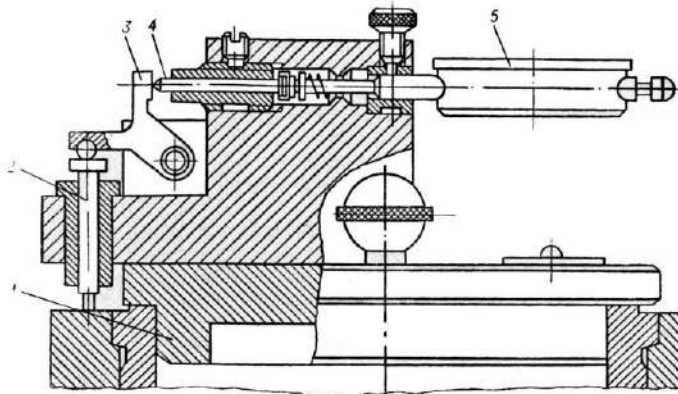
Device to control bush sleeve ledge butt-end above cylinder plane: 1 – base; 2 – pin; 3 – lever; 4 – rod; 5 – indicator
